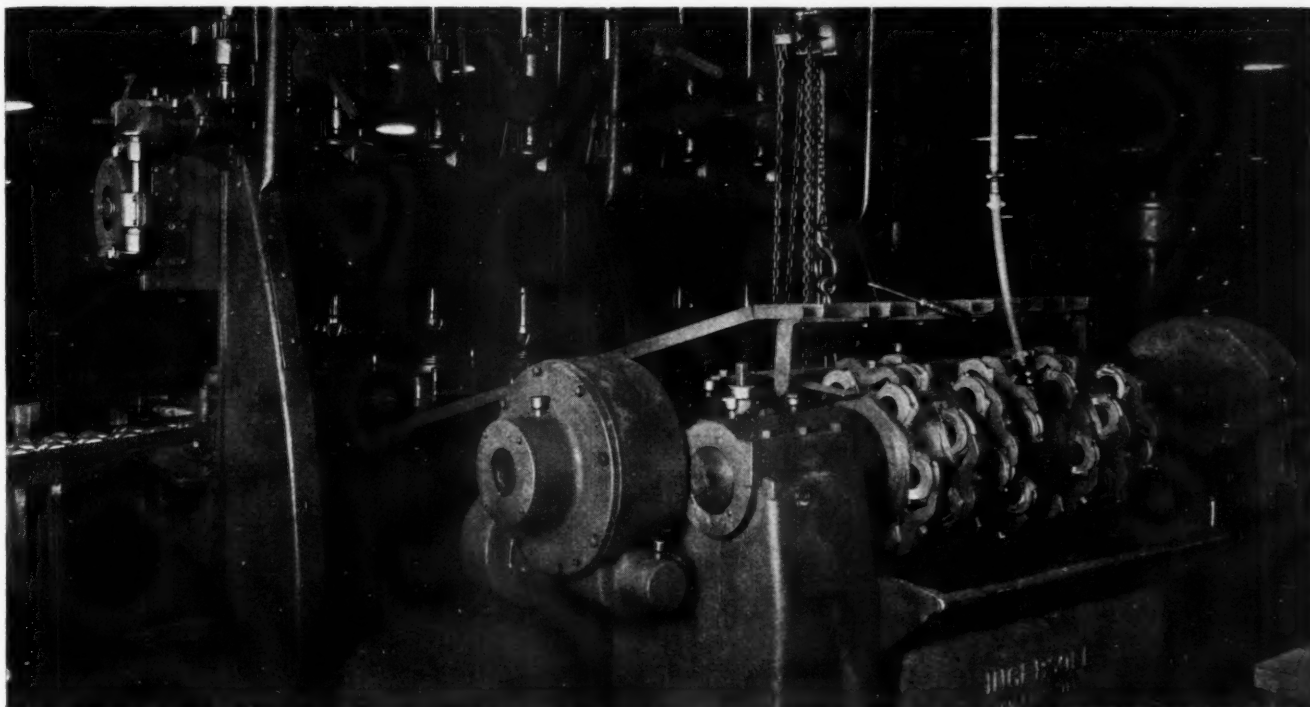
Sides of bearing caps are straddle-milled in this Ingersoll drum type milling machine, several complete sets being operated on at once. Machining is continuous
